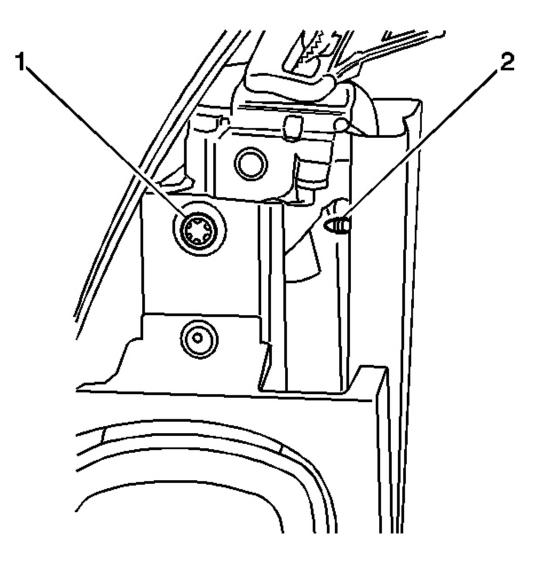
Locating Seat Belt Retractor Bracket Bolt & Push Pin Courtesy of GENERAL MOTORS CORP.
